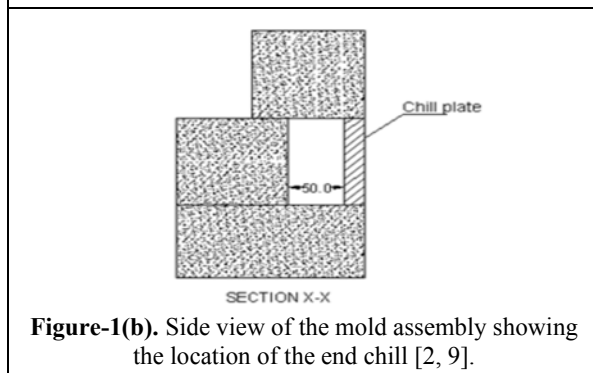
(b). Side view of the mold assembly showing the location of the end chill [2, 9].
